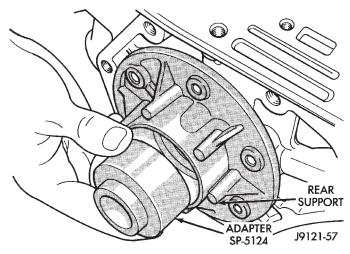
Positioning Adapter Tool In Rear Support Or Overdrive Piston Retainer—46RH
